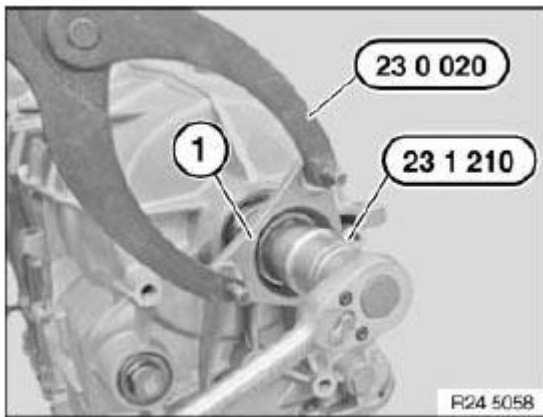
Identifying Special Tools (23 0 020 And 23 1 210)
